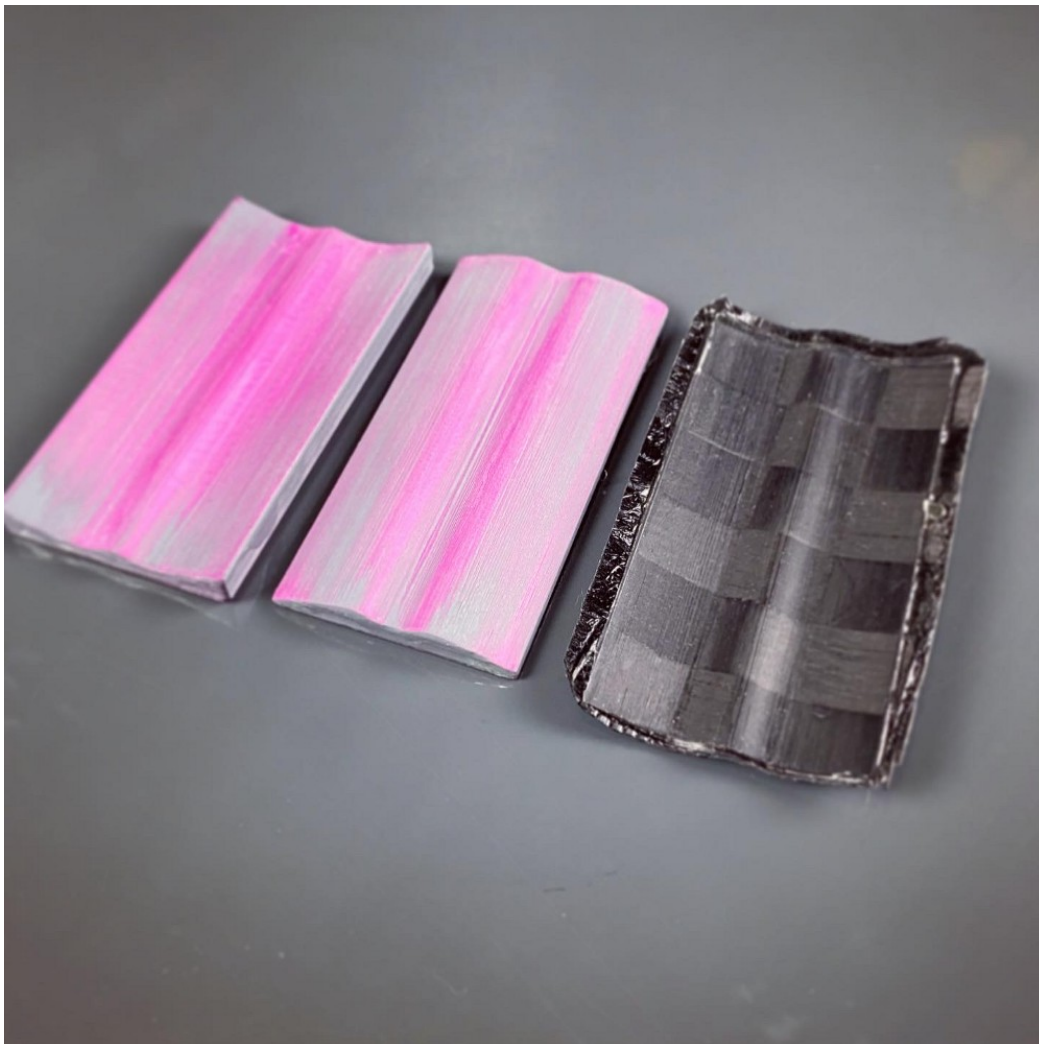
3D printed molds used for making contoured throwing blades along with the finished carbon fiber piece.
